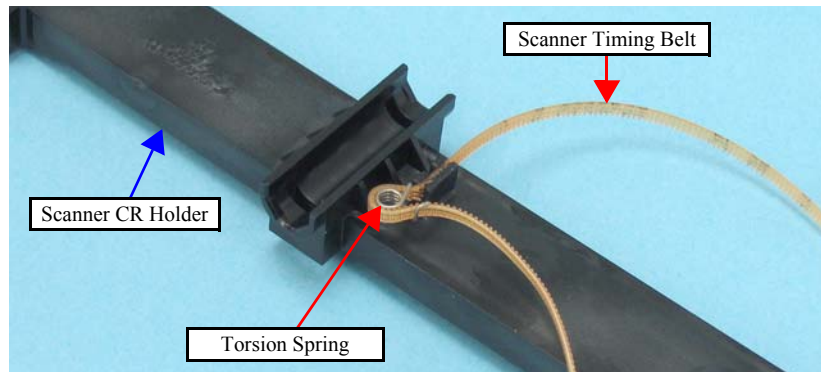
Removing the Scanner Timing Belt and Torsion Spring
